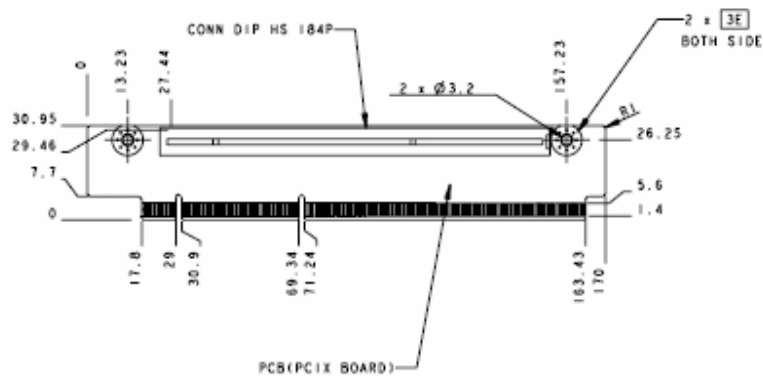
1U PCI-X* Riser Card Mechanical Drawing
